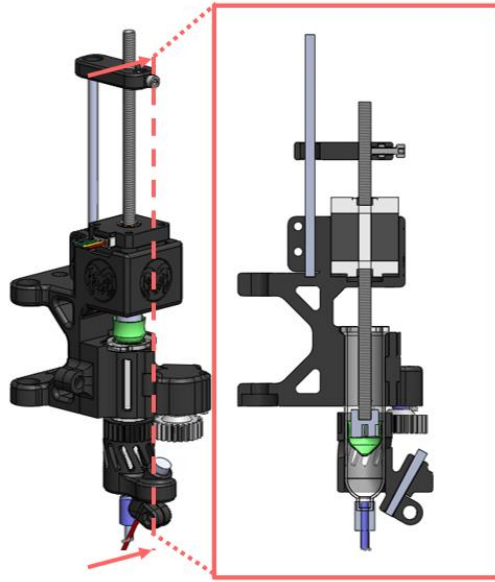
Cross sectional view of the linear actuator extrusions system.
